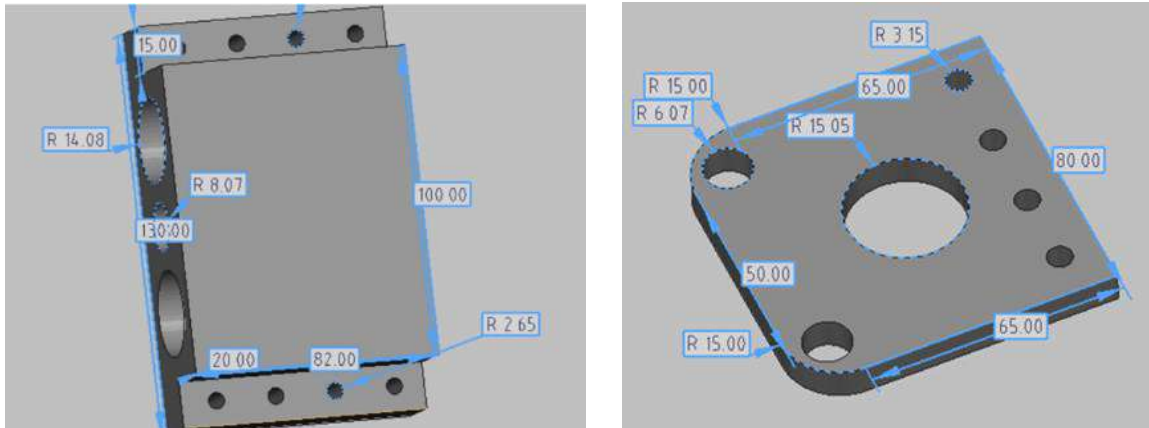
(a) Y- axis stepper motor/bearings (b) X axis side supporter
